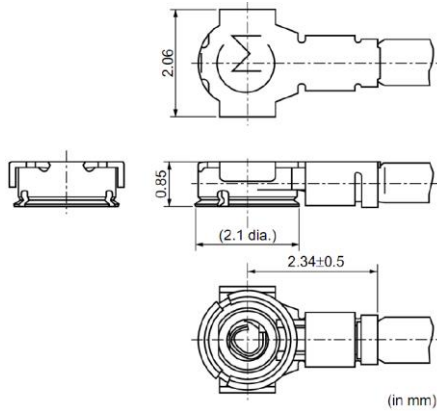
Specifications of Mating Plugs Using $\varnothing 0.81$ mm Coaxial Cables
